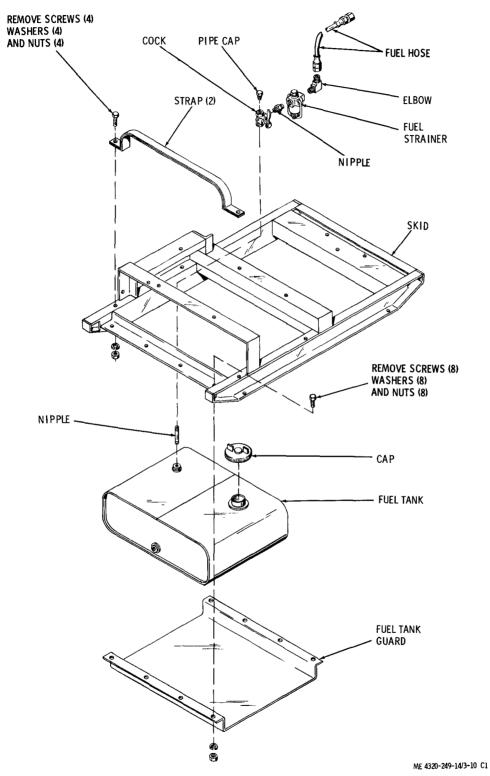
Fuel tank, strainer, lines, and fittings, disassembly and reassembly (serial numbers 449593 through 449657).
